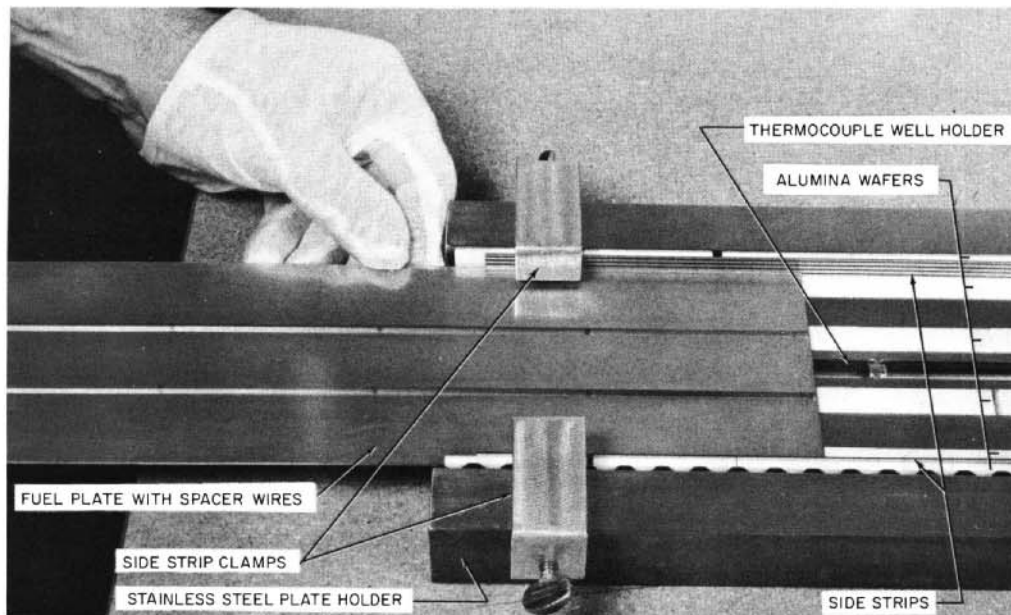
Slipping Fuel Plate into Side Strip Grooves in Plate Holder
